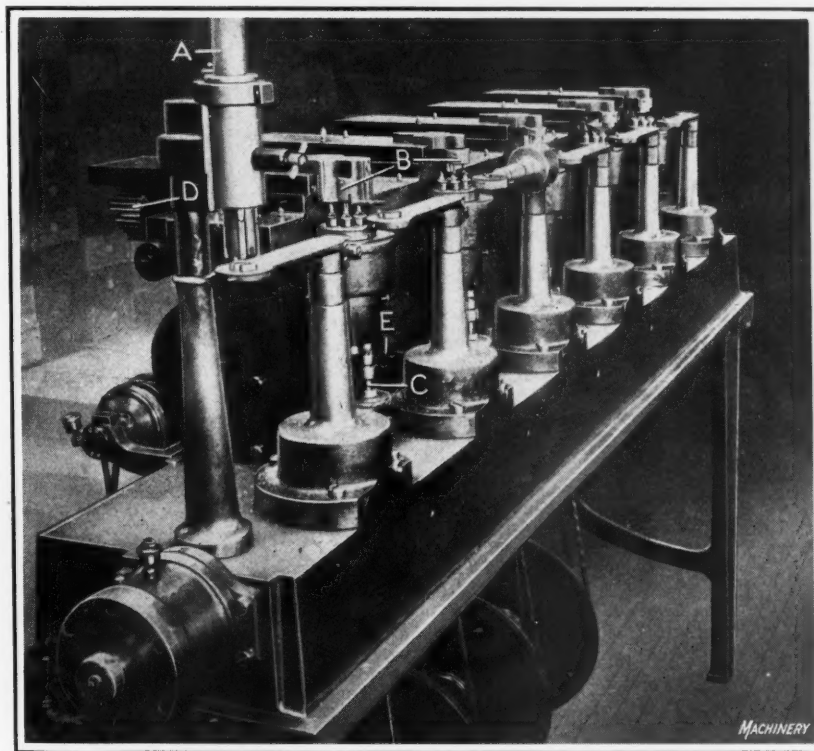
Multiple-head Plate Drilling Machine of the Full Automatic Type
